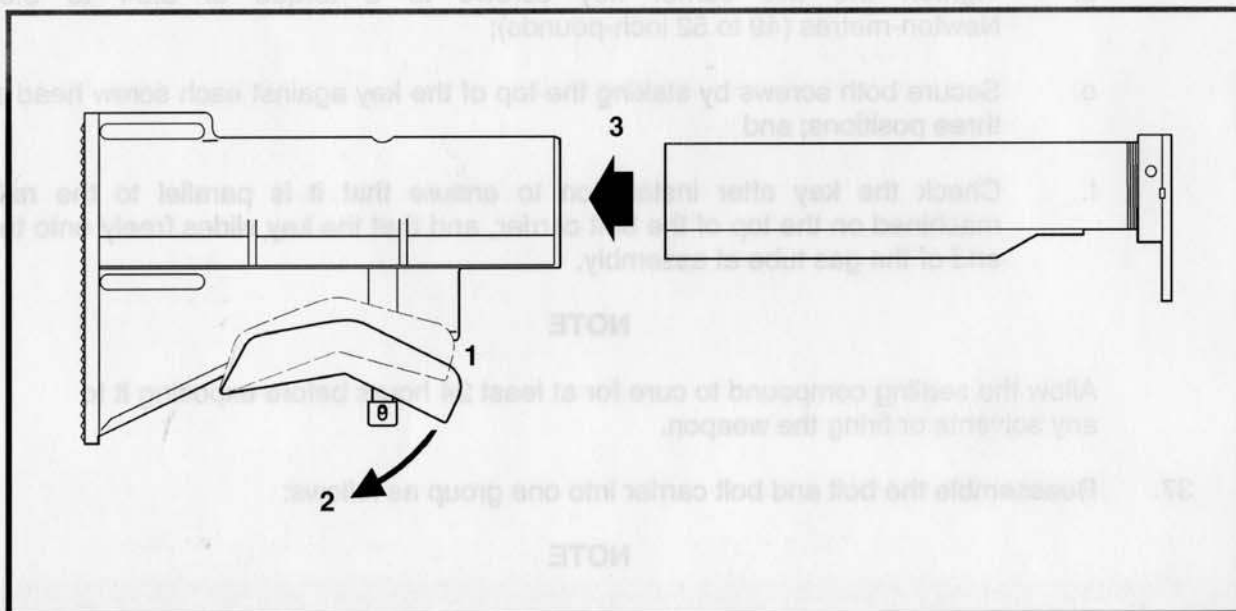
Removing the Sliding Buttstock Assembly
